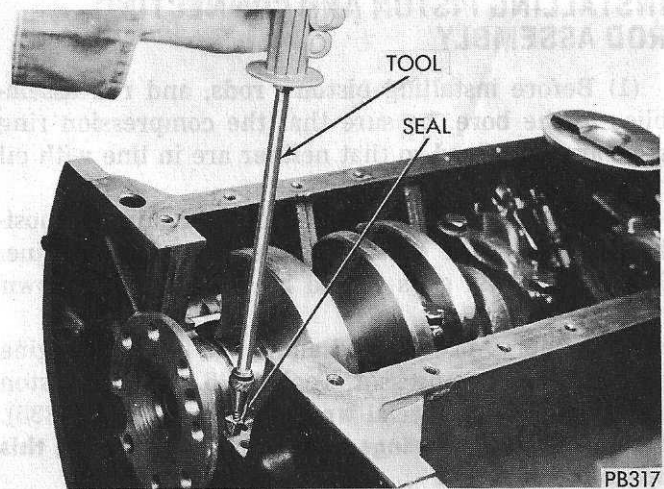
Removing Upper Oil Seal with Tool C-414B
